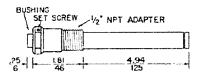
Part No. WEL14A-600R bulb well for tiquid immersion applications where the temperature bulb may be removed without draining the tank.
